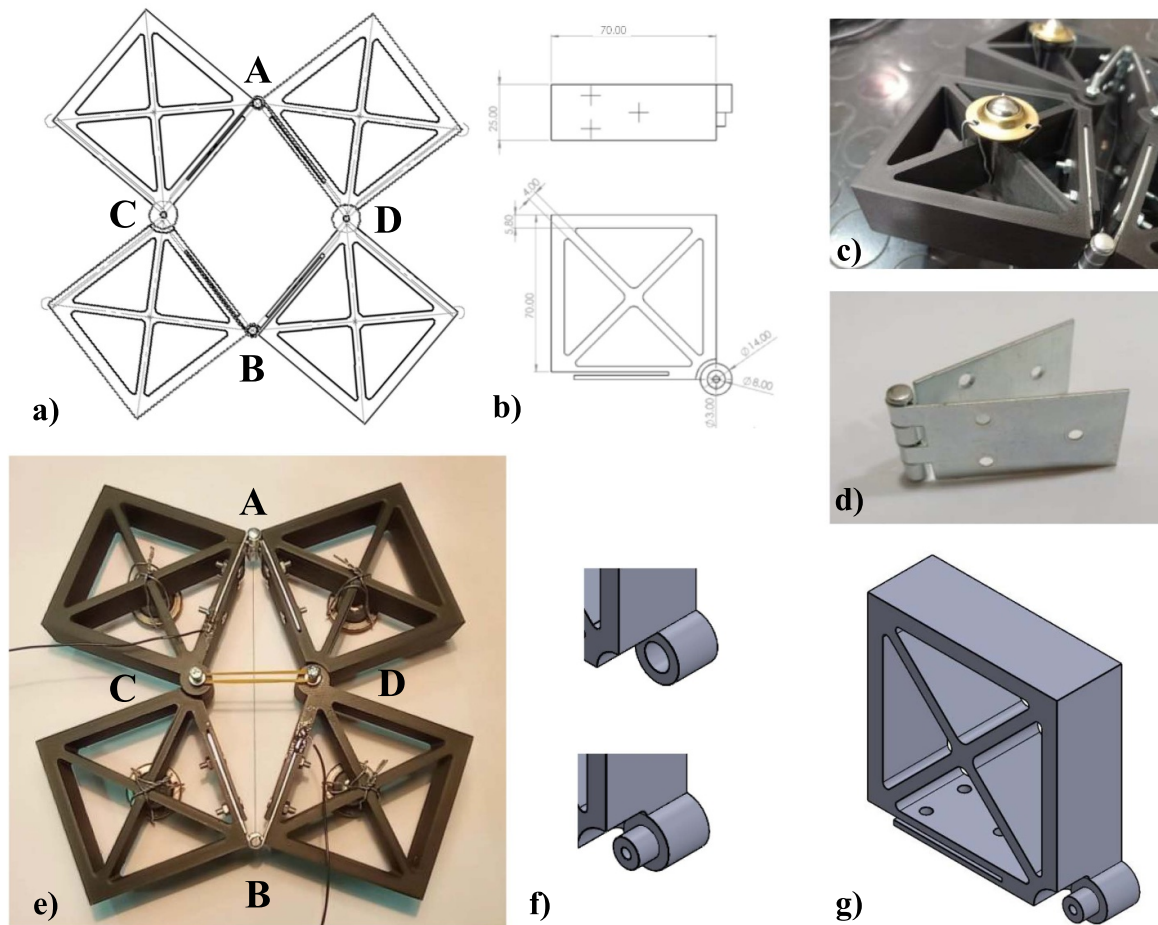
Technical drawing of (a) assembled and (b) individual rotating square units making up the actuator. (c) Spherical bearings used to minimise friction between supporting surface and actuator and (d) metallic hinges inserted in points A and B of the system. (e) SMA-metamaterial actuator showing the wire inserted between points A and B, the elastic rubber bands (bias mechanism) between points C and D and the wiring connecting the metallic hinges to the power supply. Figures (f) and (g) show a zoomed in version of the joints at points C and D which are jointed together through the insertion of a metal M3 screw.
